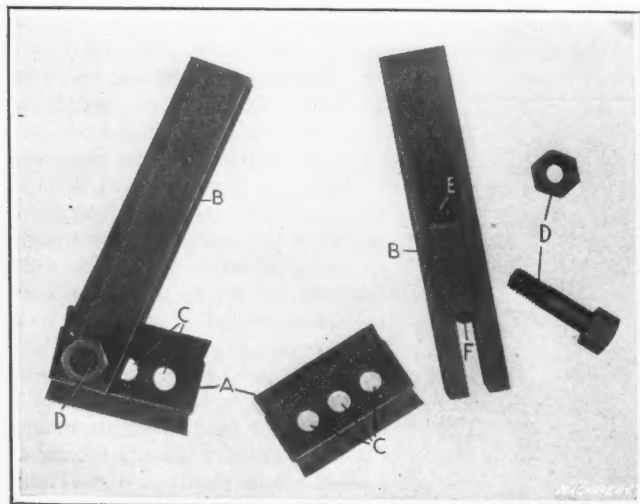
Chapin & Baker Tool-holder for roughing out Bevel Gear Teeth
